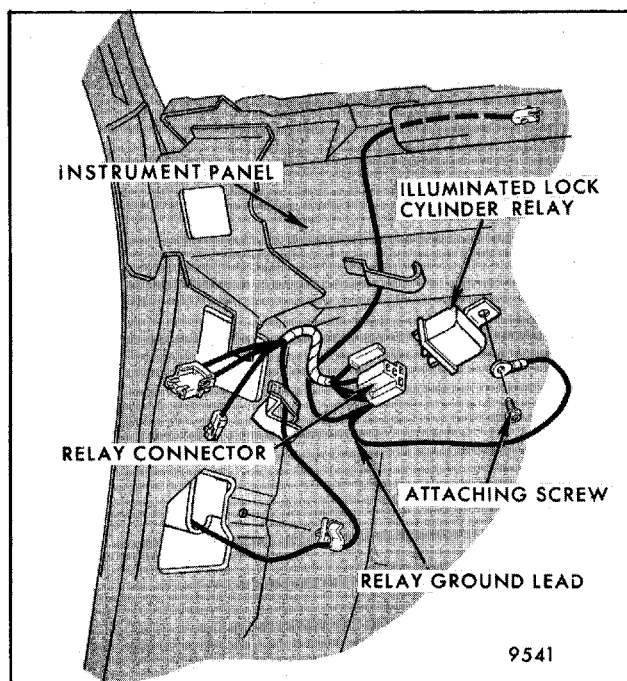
Illuminated Lock Cylinder Relay Assembly
